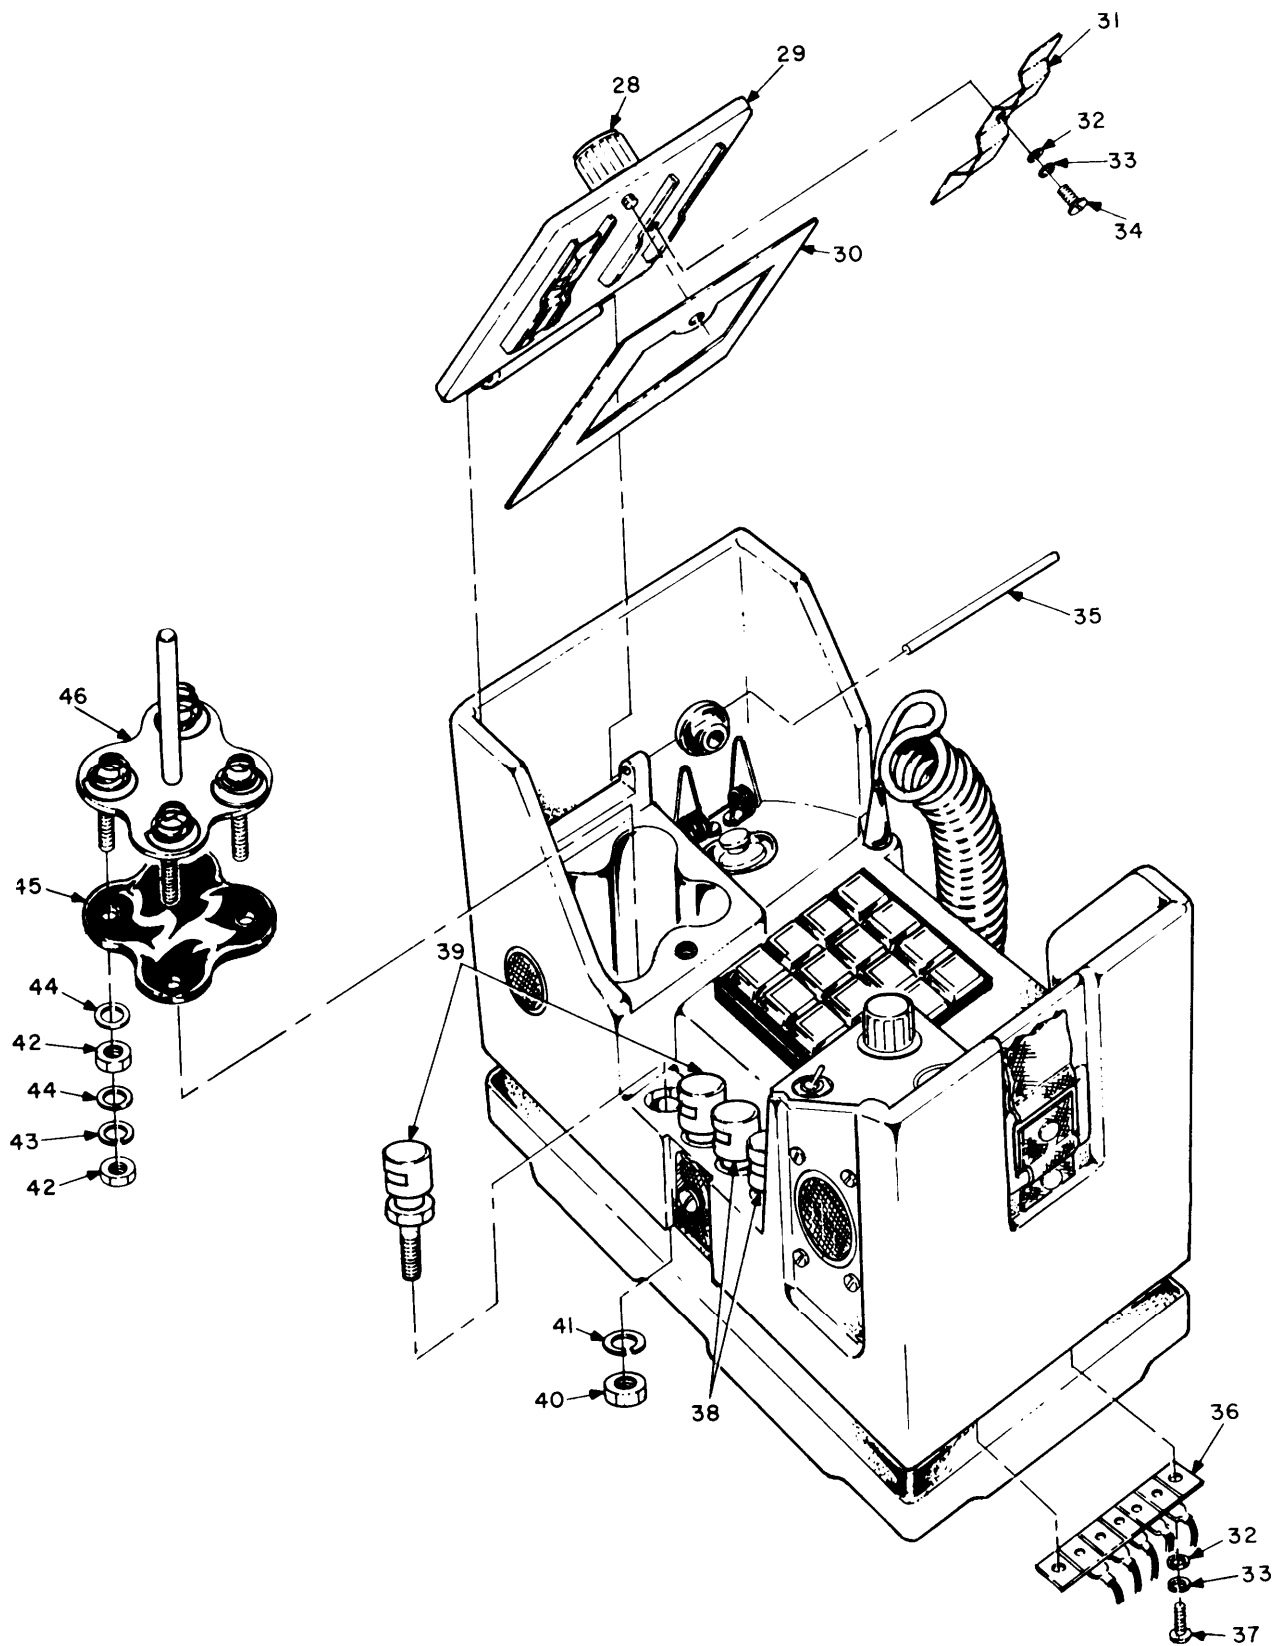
① . Shell assembly (sheet 1 of 2).
